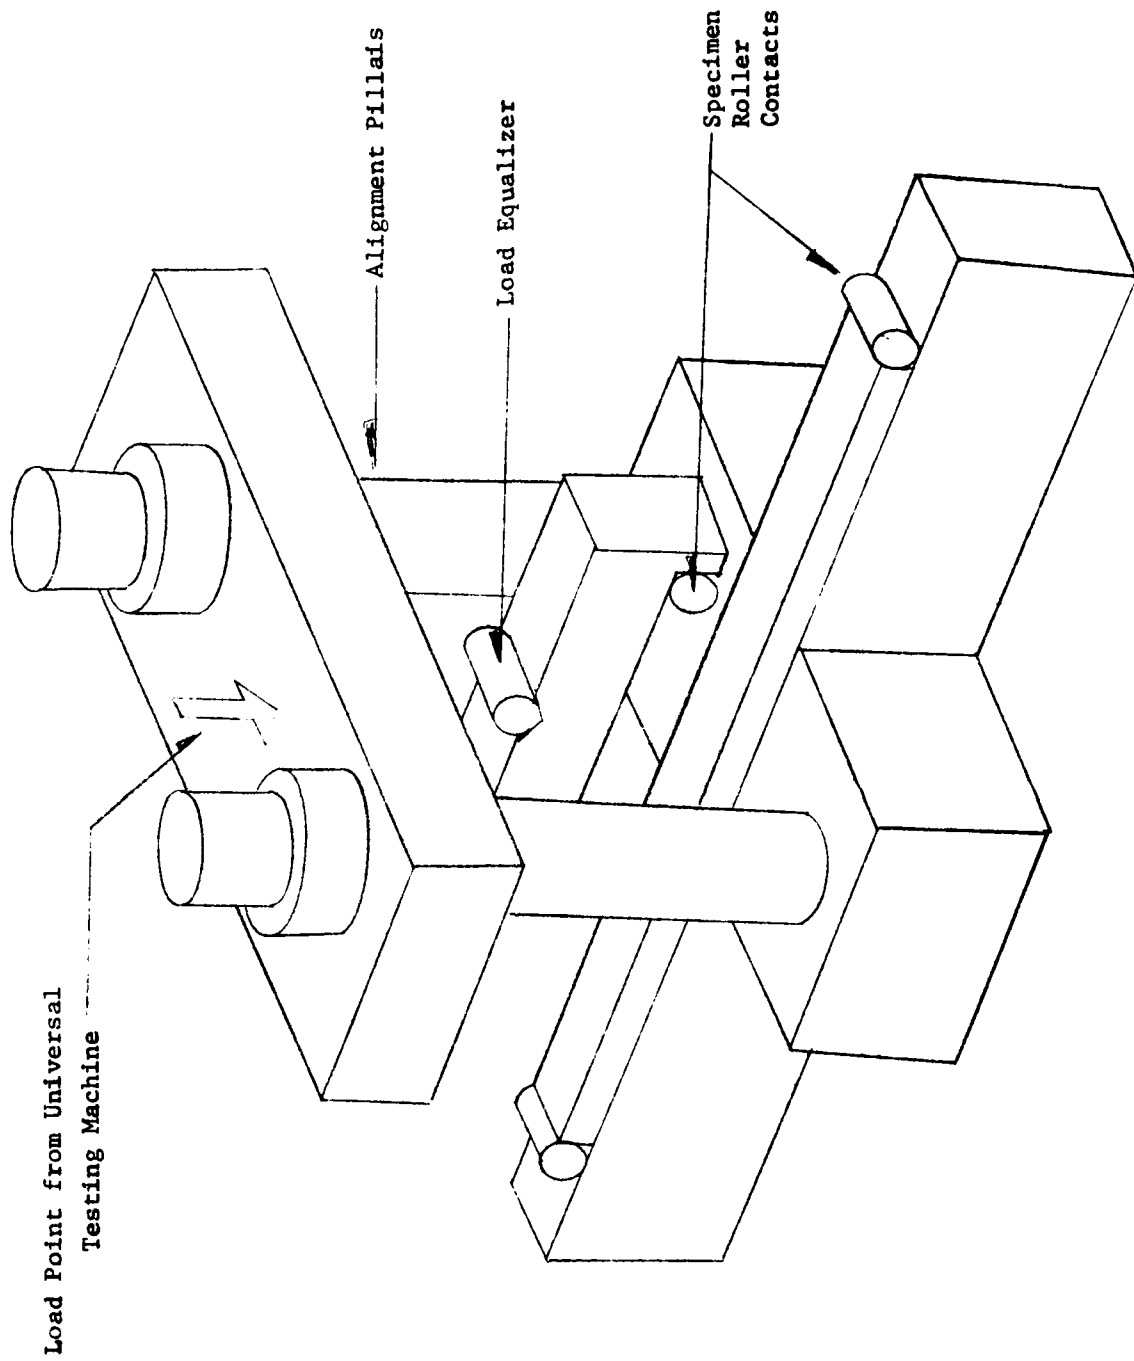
Self Aligning 4-Point Bend Fixture - Assembled View Without Specimen
